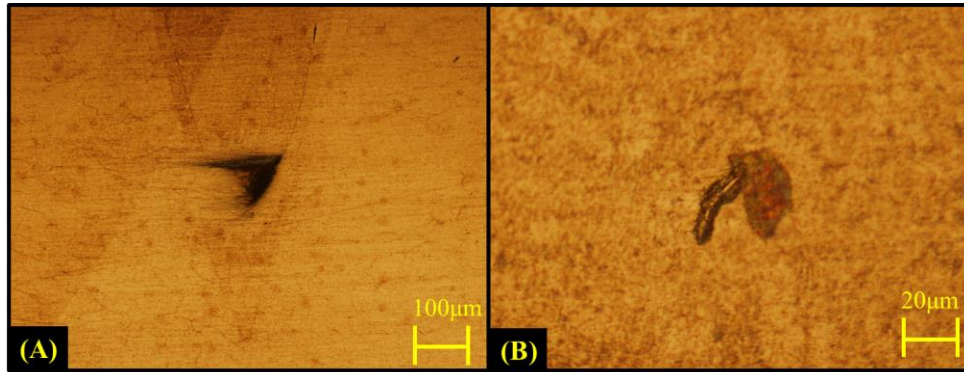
(A) Root keyhole defect on SLM+HIP+EBW sample 6A/6B (209.6 J/mm) (B) Defect on SLM+HIP+EBW sample 6A/6B weld (209.6 J/mm)
